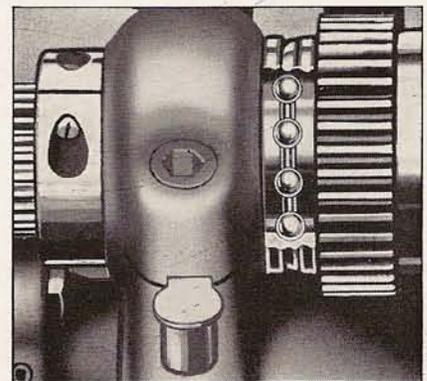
Ball Thrust Bearing and Take-up Nut, Eliminate Spindle End Play
